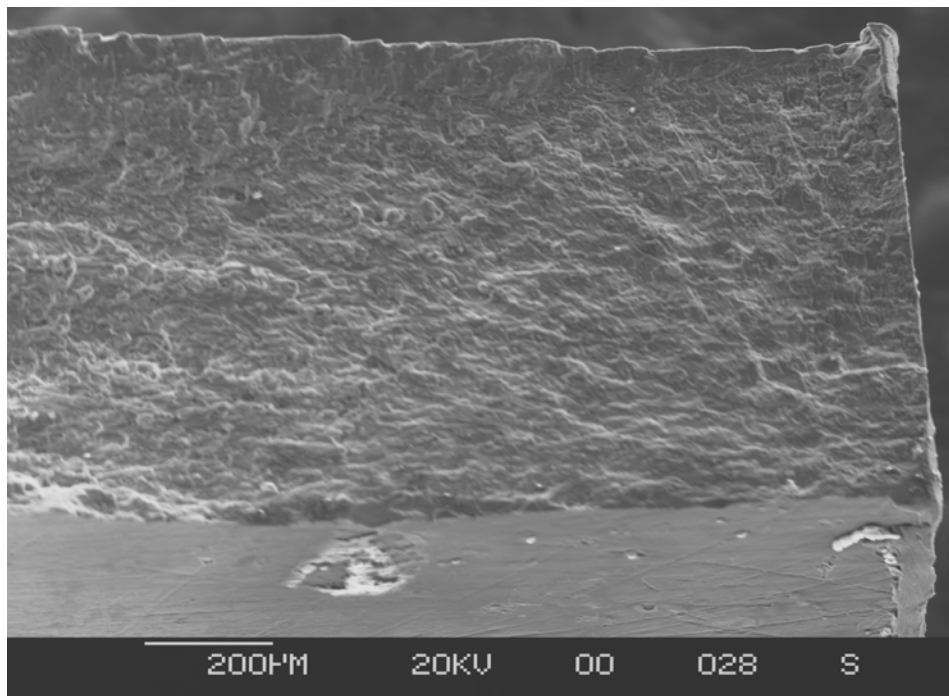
Fatigue Crack on Fracture Surface of Specimen 5830.
